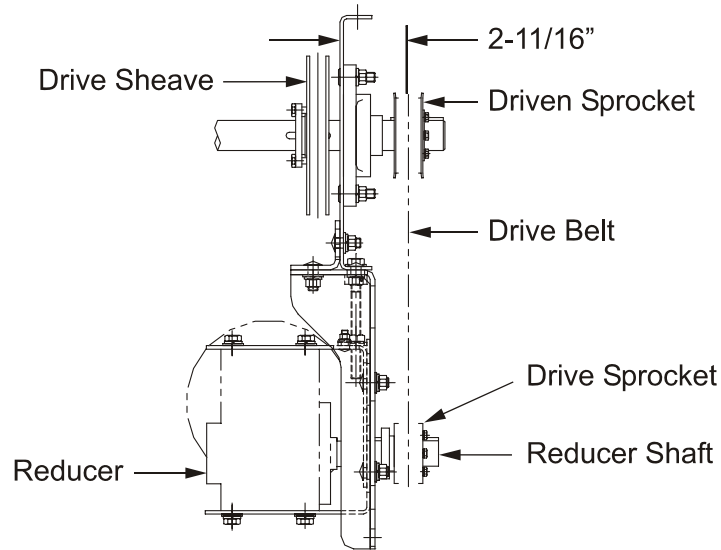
Under hung-Mounted Drive Sheave Assembly
